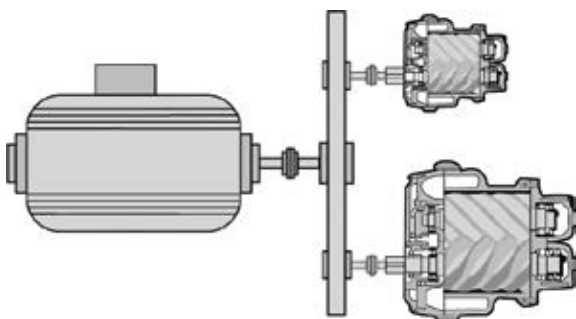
Simplified diagram shows the monitored machine train. The drive motor is visible on the left side of the bull gear, and the low-pressure and high-pressure screw compressors are on the right side – with the bull gear driving their individual pinion gears.
